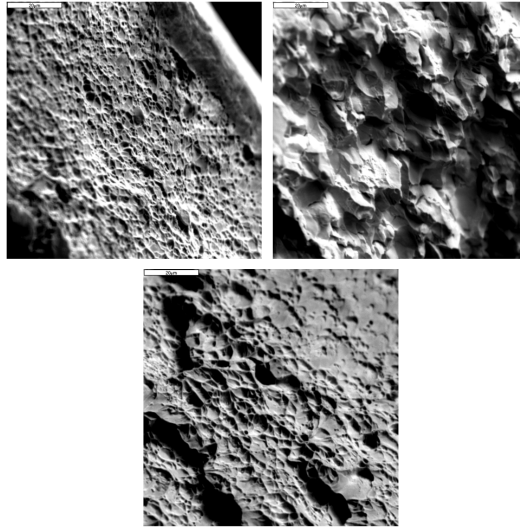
Fracture surfaces of tensile test specimens showing a ductile dimple failure mode (top left), an intergranular failure mode (top right) and a mixed mode (bottom)
